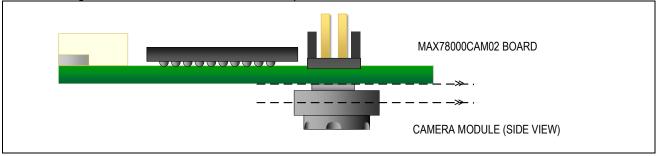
MAX78000CAM02 Board and Camera Module—Side View
